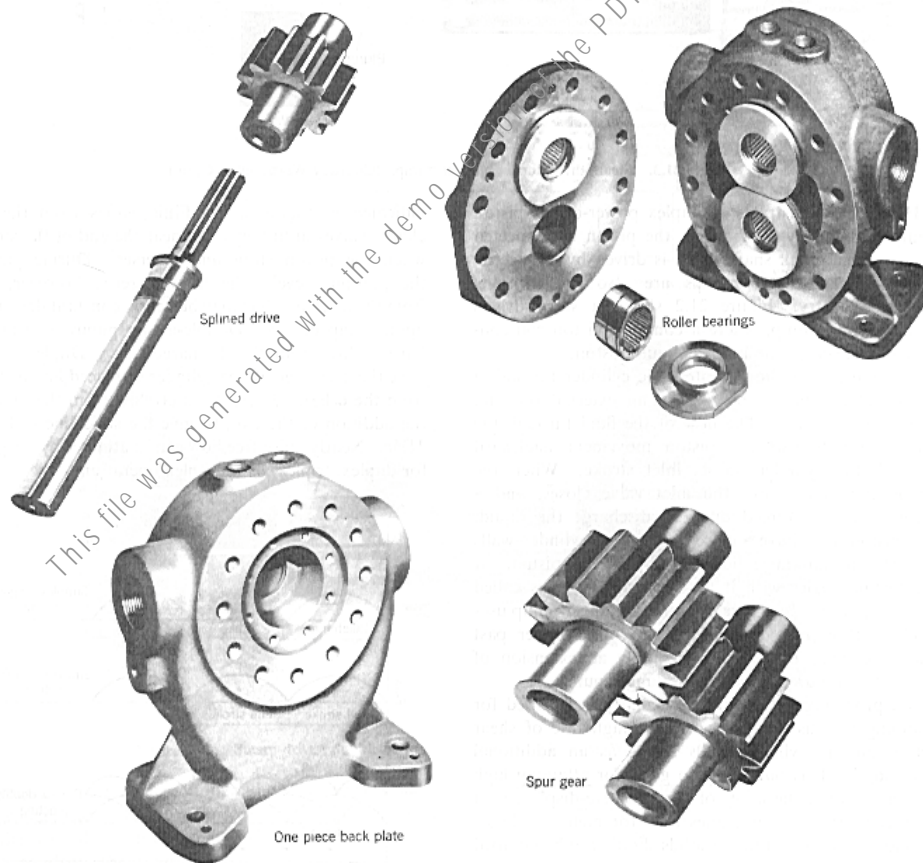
Exploded view of rotary-gear pump. (Courtesy Sier-Bath Gear and Pump Co.)
